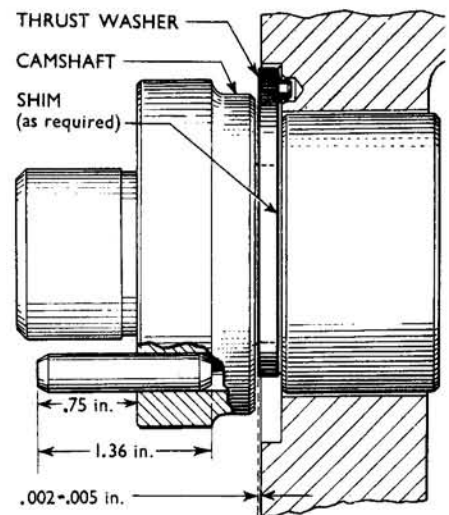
Thrust washer used with early type camshaft should protrude 0.002-0.005 from front face of cylinder block; shims are available to increase protrusion. Refer also to Fig. 36.
